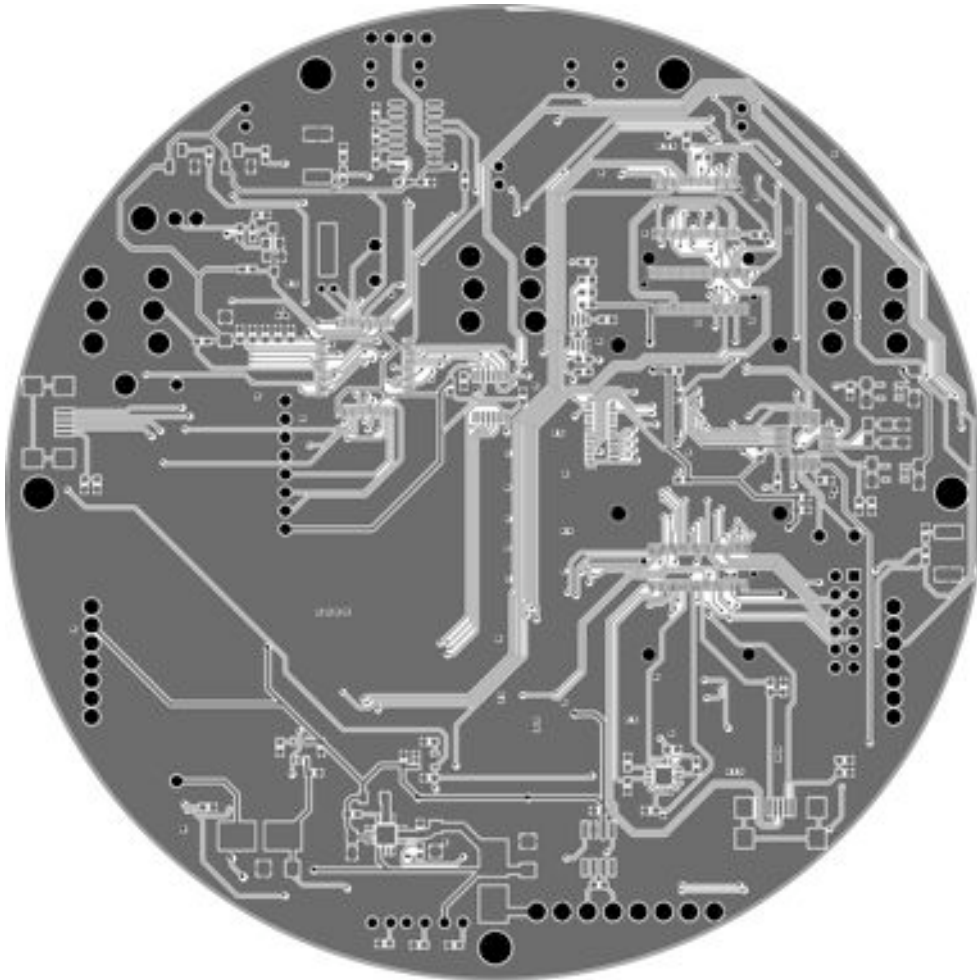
Steering Wheel PCB: Bottom layer with silkscreen.
